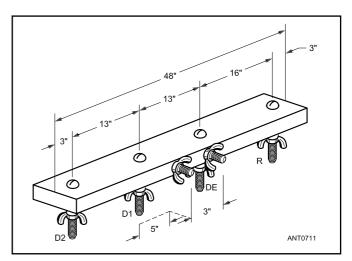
Detail of the boom showing hole center locations and boom to mast connection points.
